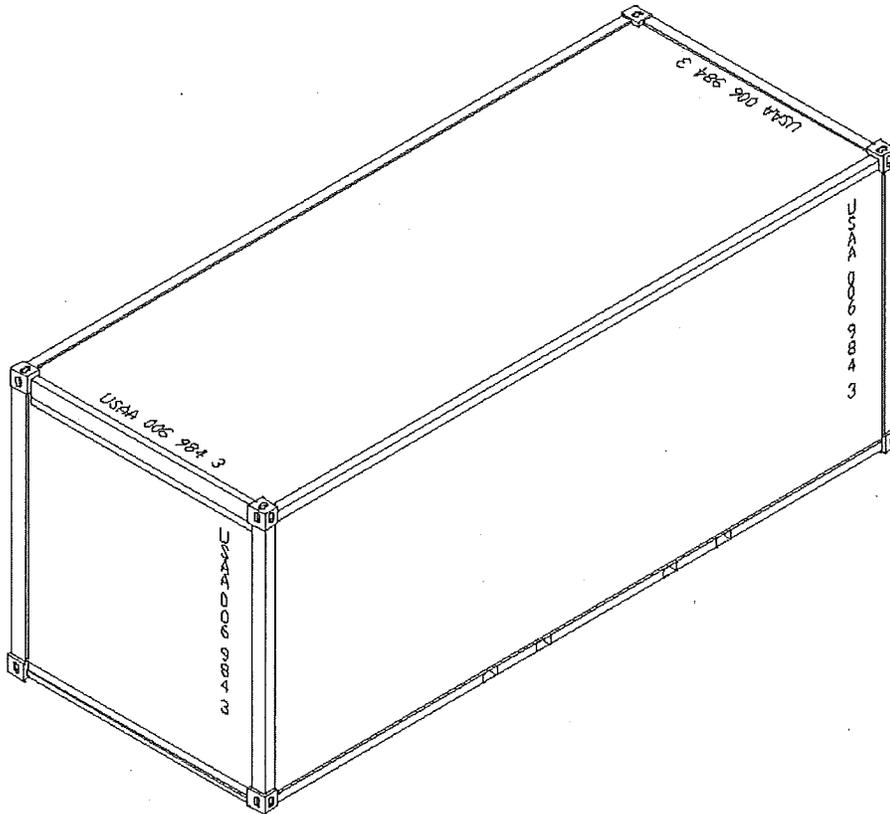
C -TYPICAL VERTICAL LAYOUT OF
